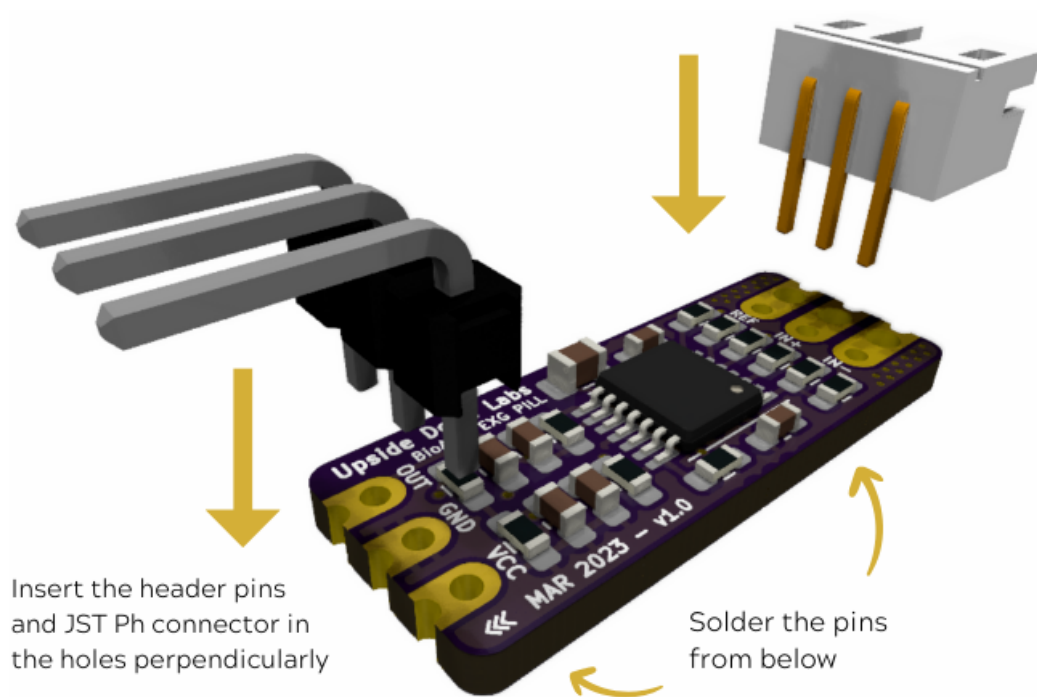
Soldering the connector & header pins on BioAmp EXG Pill
